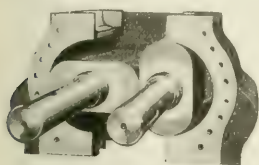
PUMP WITH HEAD PLATE REMOVED
